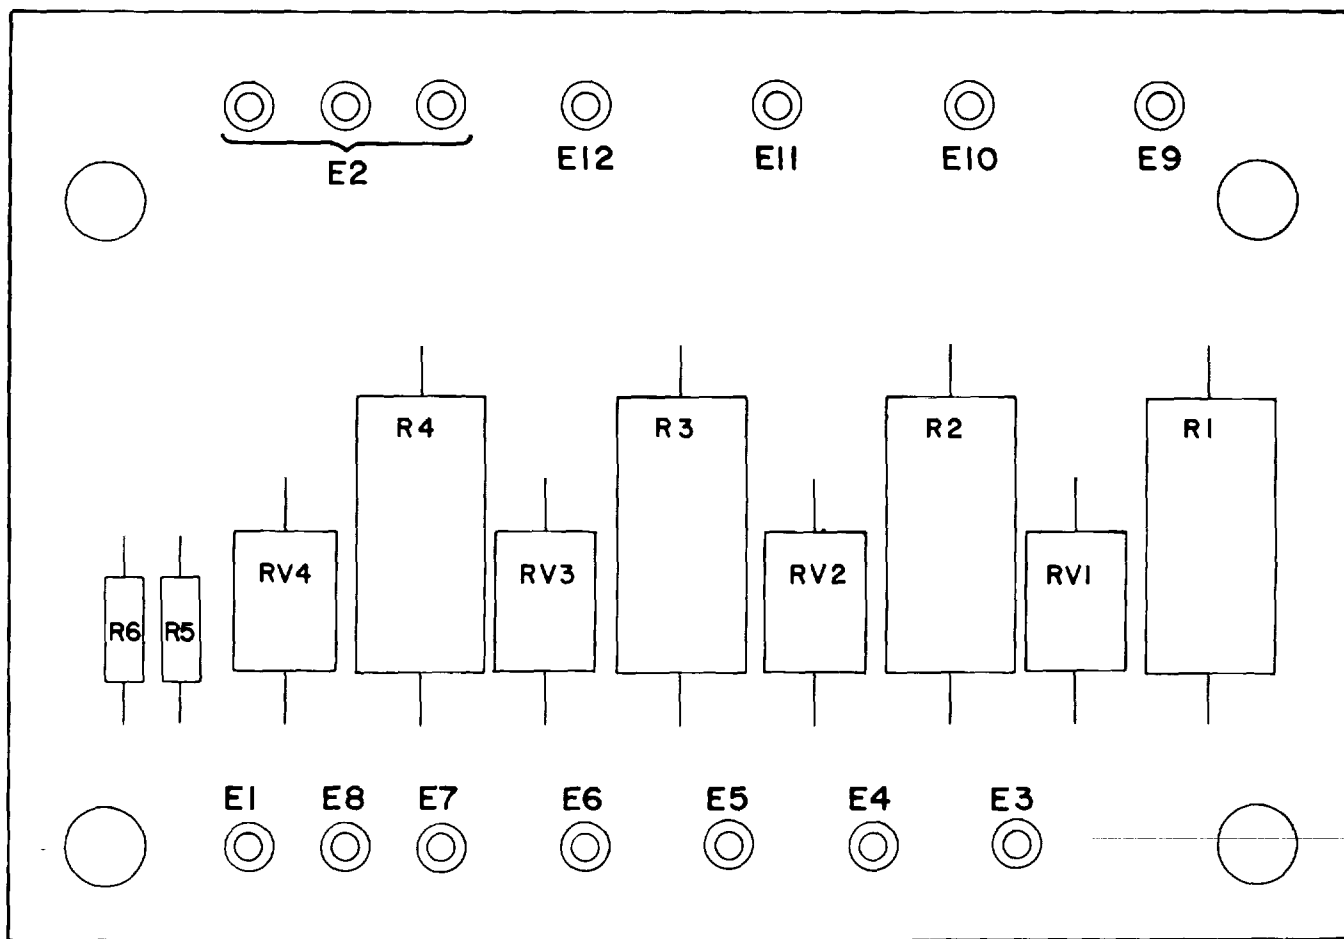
Voltage Surge Suppressor Circuit Card Assembly, 4A4 Parts Location Diagram
